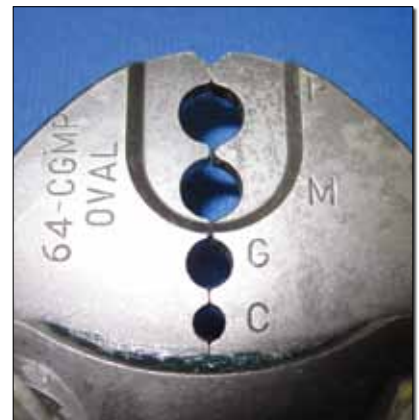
Each lettered groove on a Nicopress tool corresponds to a particular cable and sleeve size.
